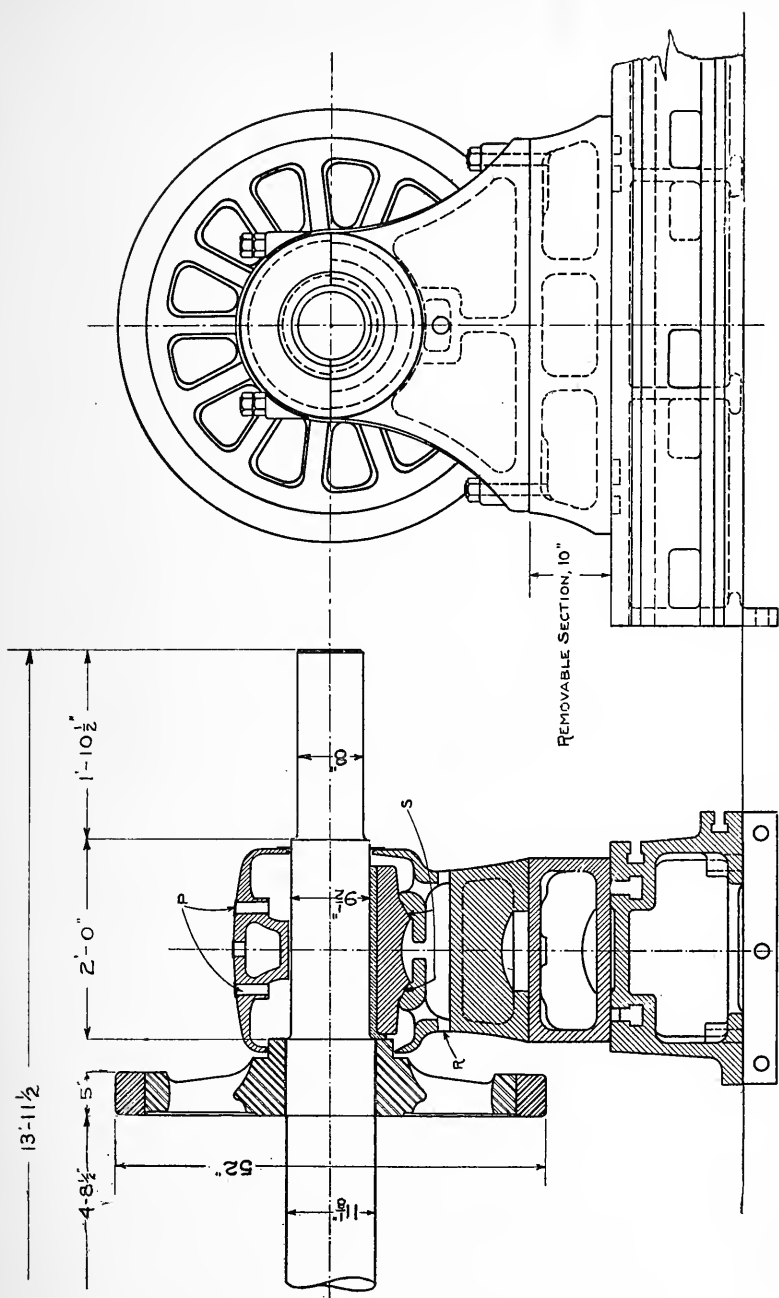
ONE OF THE SUPPORTING WHEELS, WITH ITS AXLE, BEARING, PEDESTAL, AND BED PLATE.
